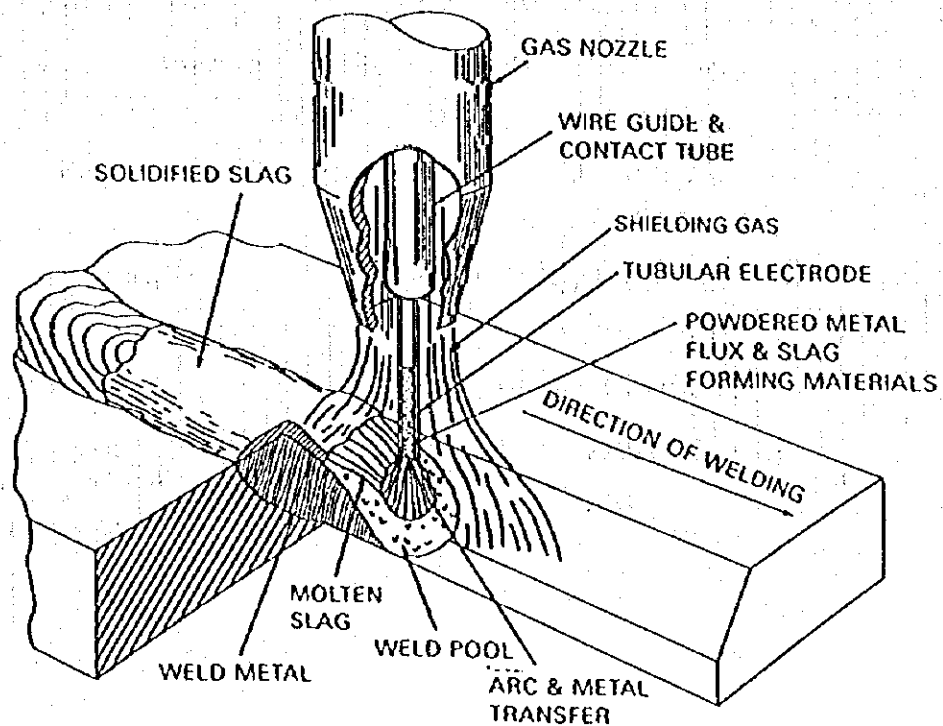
Gas Shielded Flux Cored Arc Welding
